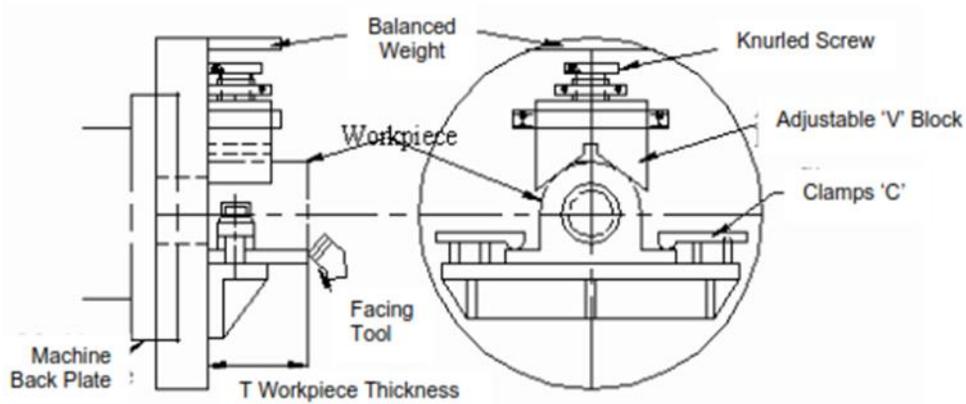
Turning Fixture (Boring and Facing Fixture)
